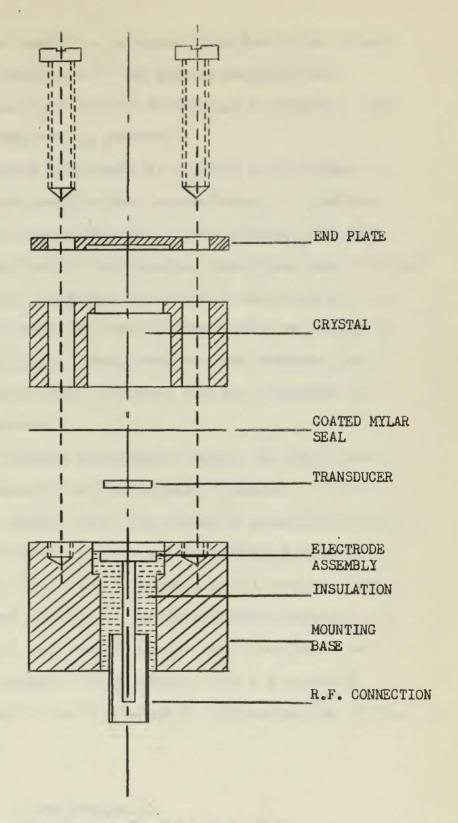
SAMPLE-MOUNTING ASSEMBLY
